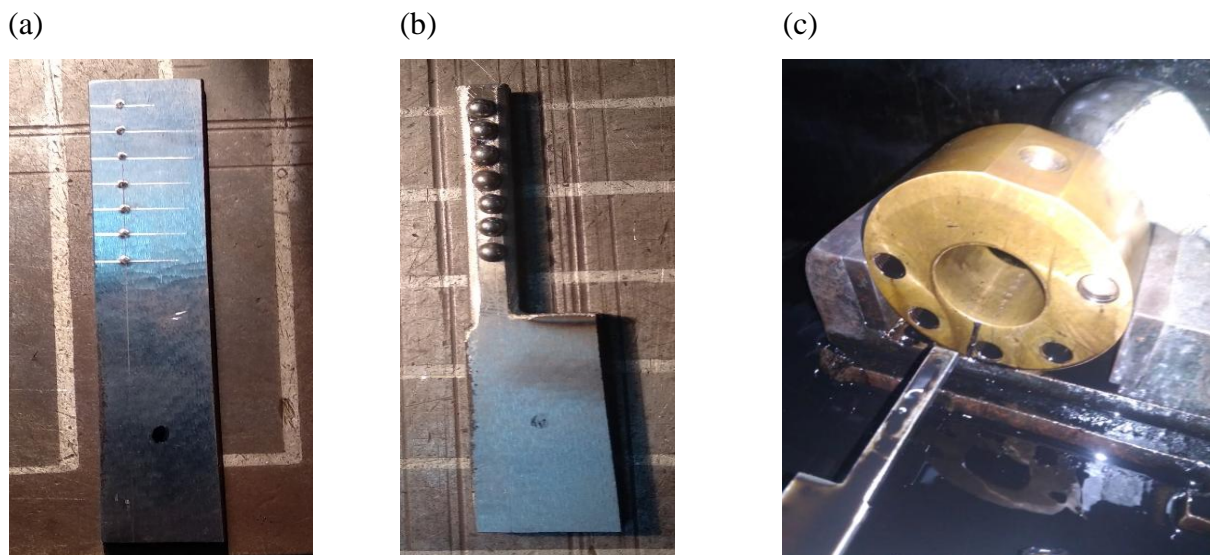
(a) Flat fixture for holding the ball (b) The prepared electrode (c) Electric discharge machining set up and positioning of electrode and work-piece.
